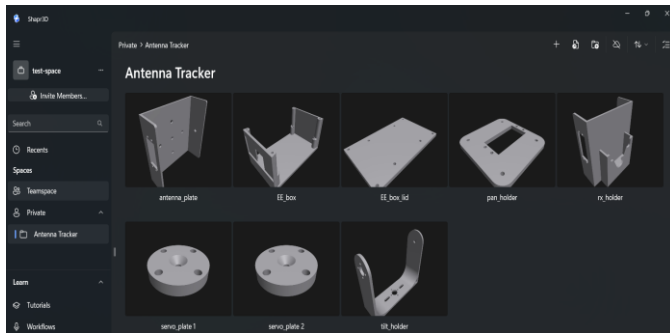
3D Components of Parts of the Tracker Frame
